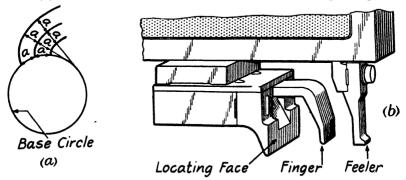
(a) Parallel Involutes, (b) Contacts of Maag TME Pitch-measuring Machine
